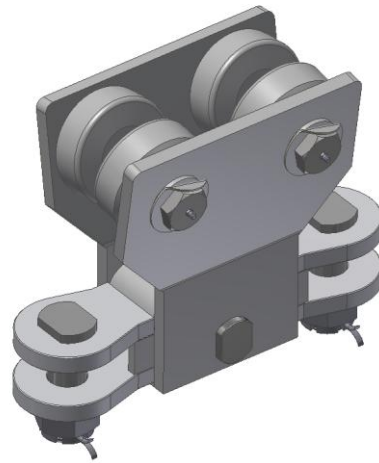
horizontal-to-horizontal bracket fixing system arrangement.
